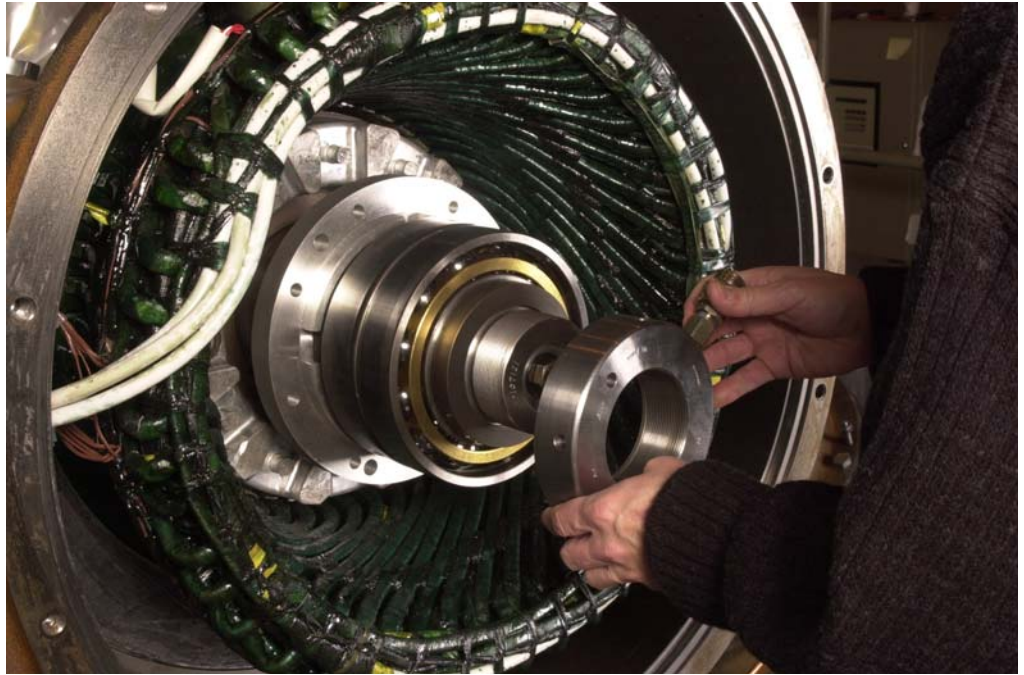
Tighten the hydraulic assembly nut using the rod provided with the nut
